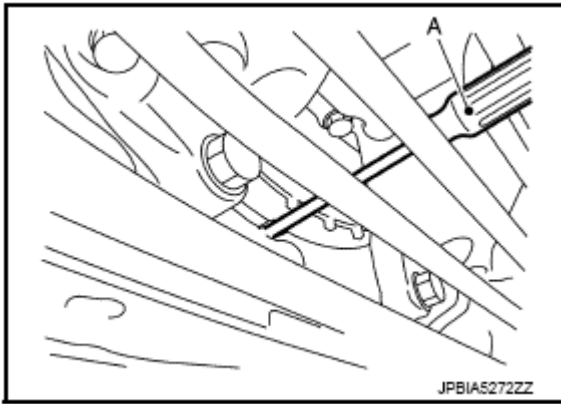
Inserting Flat-Blade Screwdriver In Notch Of Flywheel
